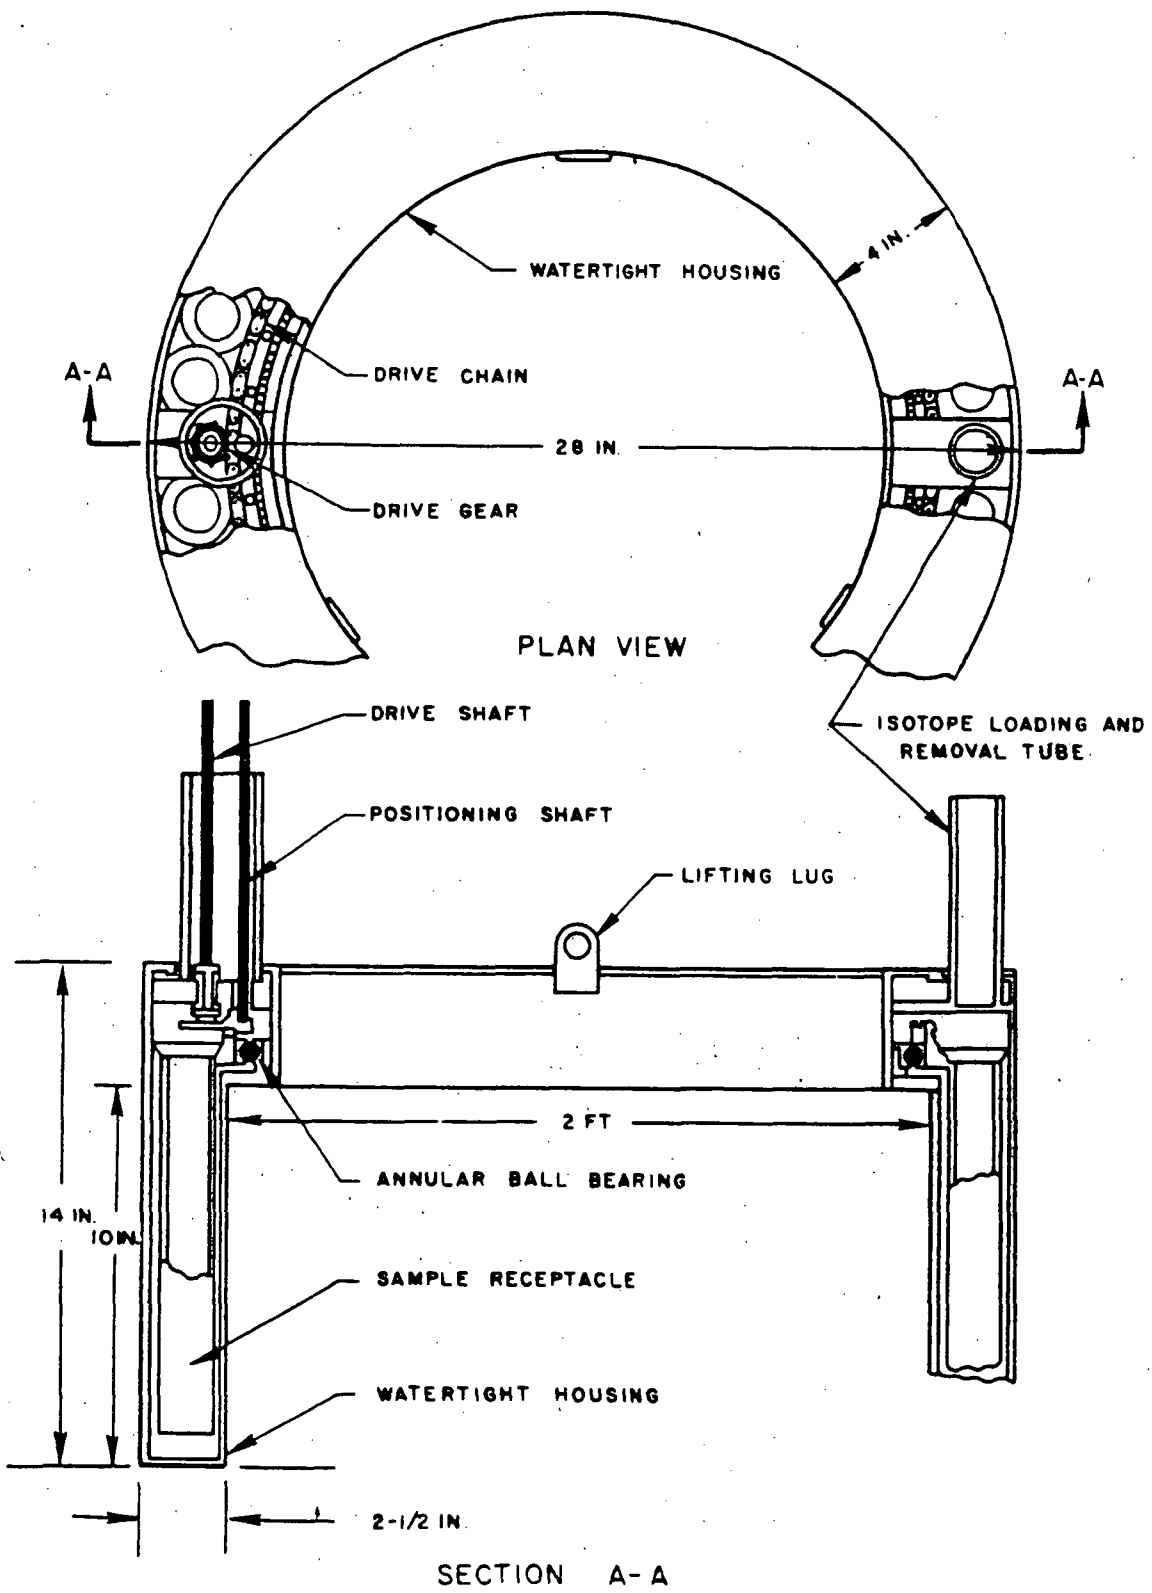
Schematic of Rotary Specimen Rack Assembly
